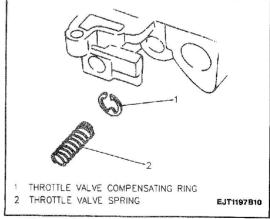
Removing Throttle Valve Spring and Compensating Ring(s)
